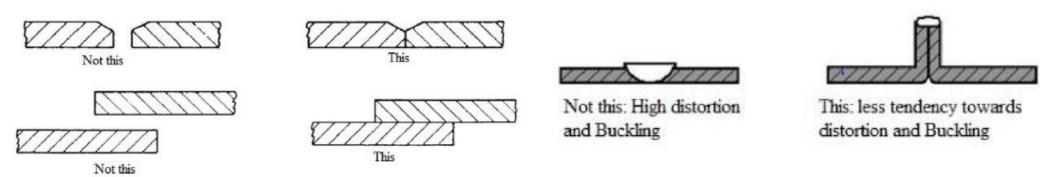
Poor and good fit-up of weld joints
